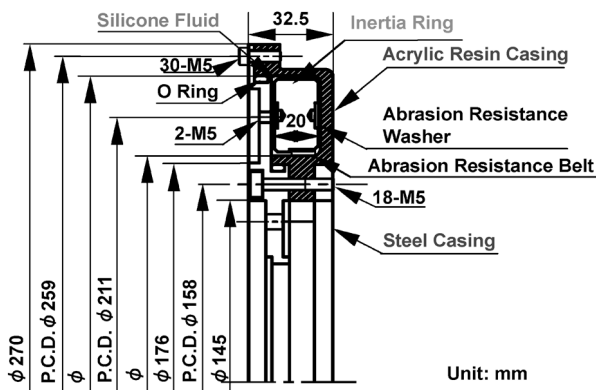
Shape and Dimensions of Test Viscous Fluid Damper
